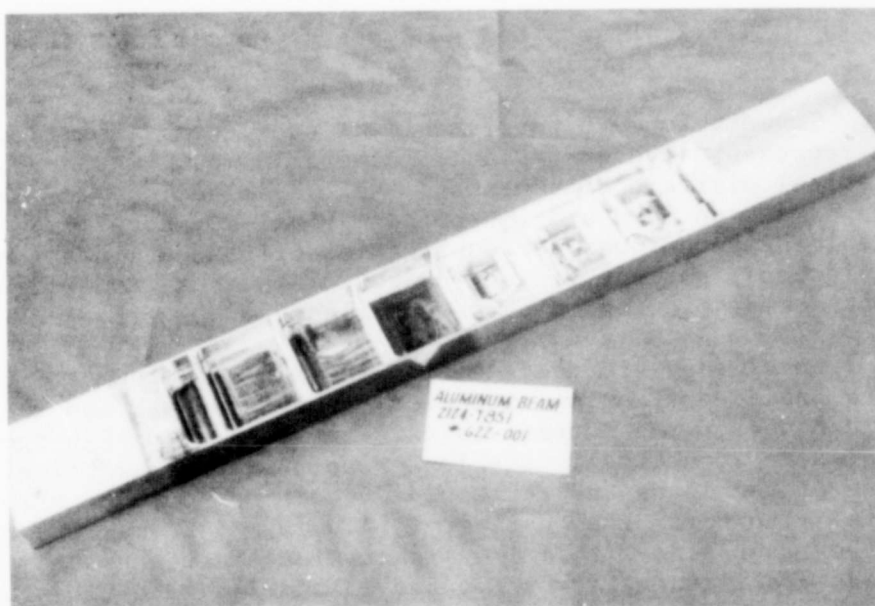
ALUMINUM I-BEAM FATIGUE TEST SPECIMEN
